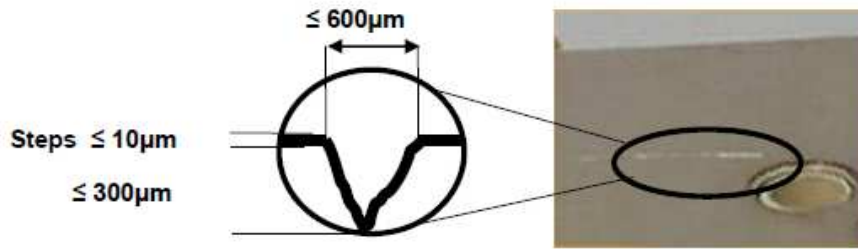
Scratches on the MiniSKiiP® bottom surface
